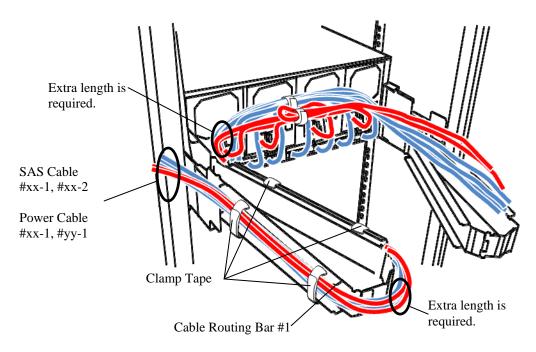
Fixation of SAS Cables (#xx-1, #xx-2) and Power Cables (#xx-1, #yy-1)
